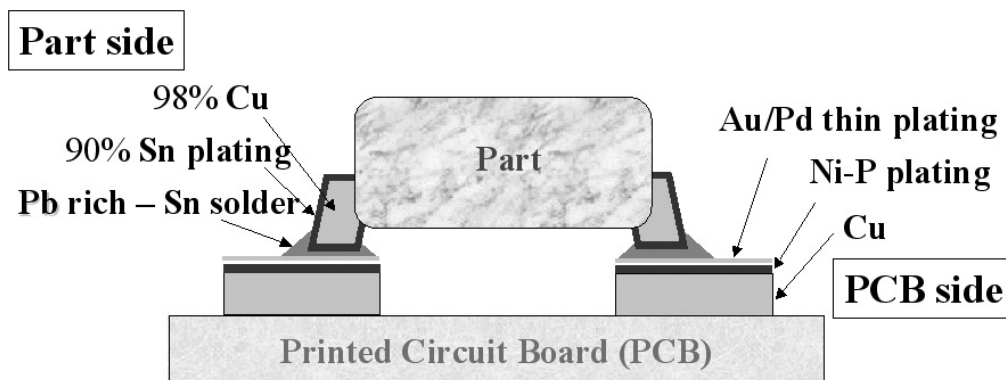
Schematic of the part soldered on the printed circuit board (PCB).
